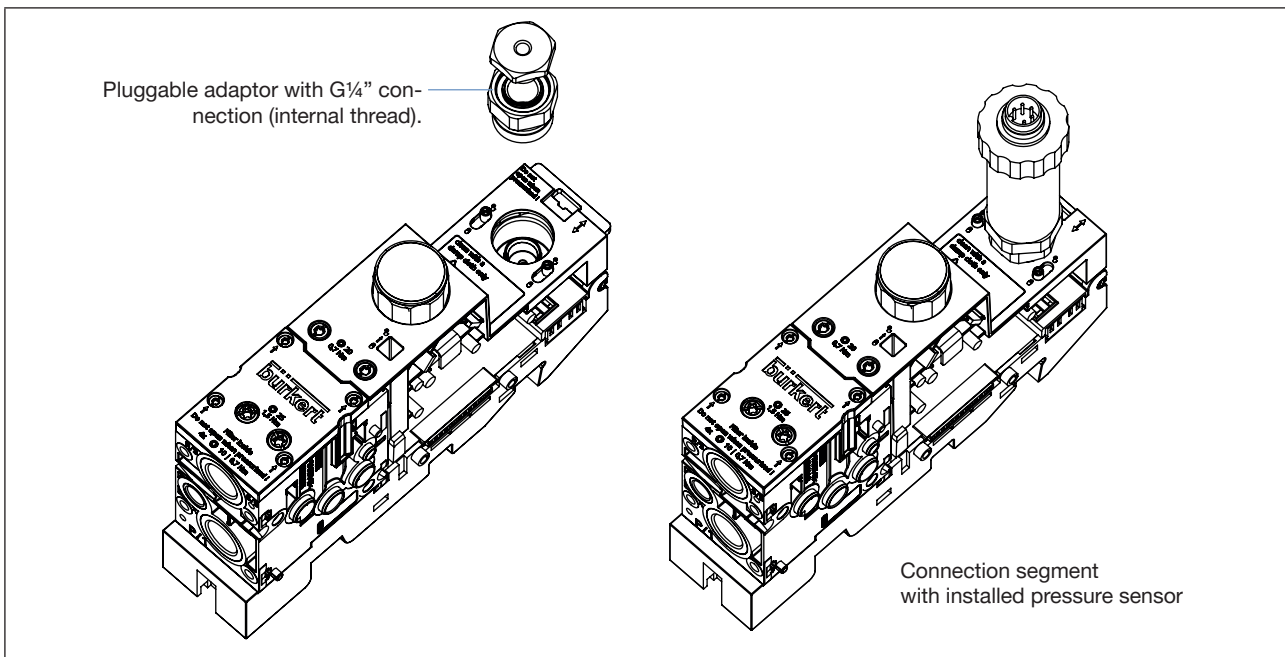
Connection of a pressure switch or pressure sensor on the pressure gauge module
